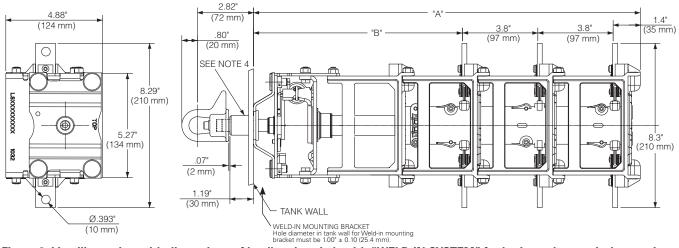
Line illustration with dimensions of loadbreak switch with "WELD-IN SYSTEM" for horizontal or vertical mounting. (Shown with "Full" deck extension.)
